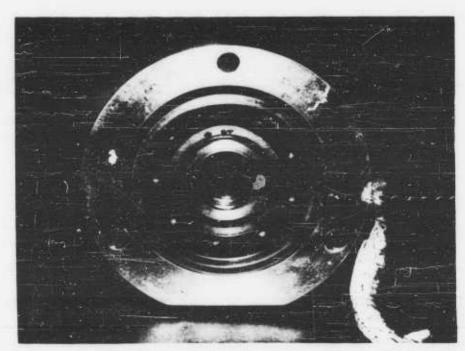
Ball Bearing MRC 205-5 Races and Balls 440C Stainless Steel Cage Machined and Riveted "S" Monel
